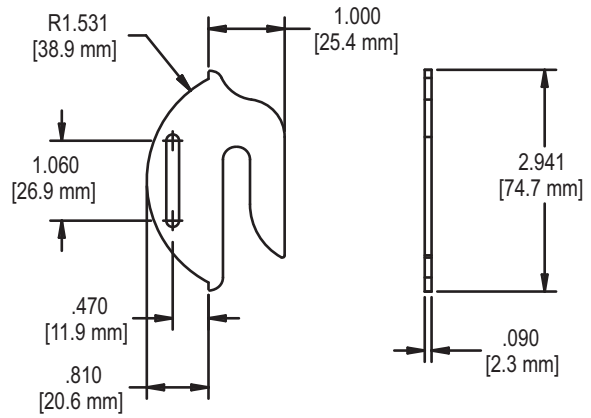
KEEPER FLANGE 33592 (RH) 33593 (LH)
